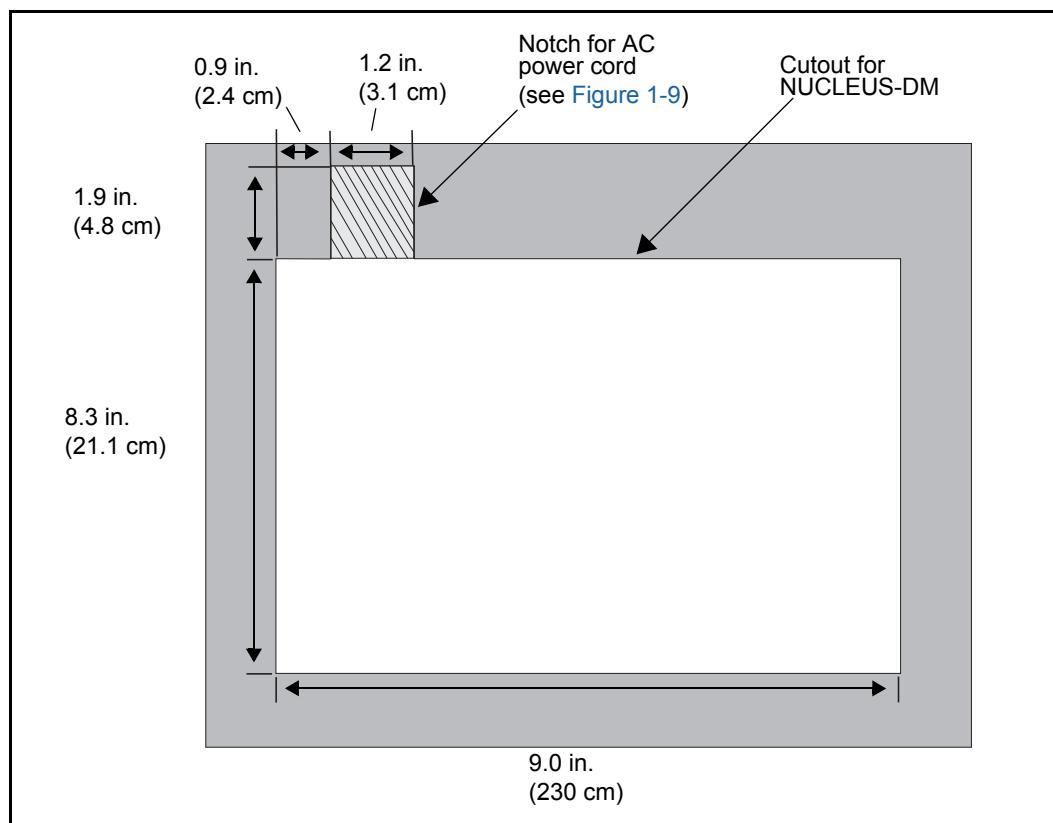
Dimensions for NUCLEUS-DM Cutout
